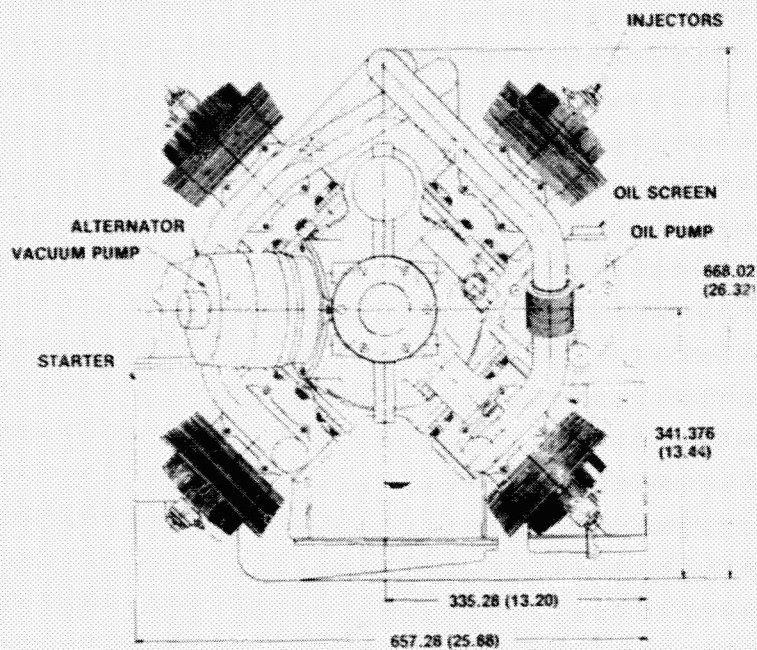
149 kW AIRCRAFT DIESEL — FRONT VIEW
